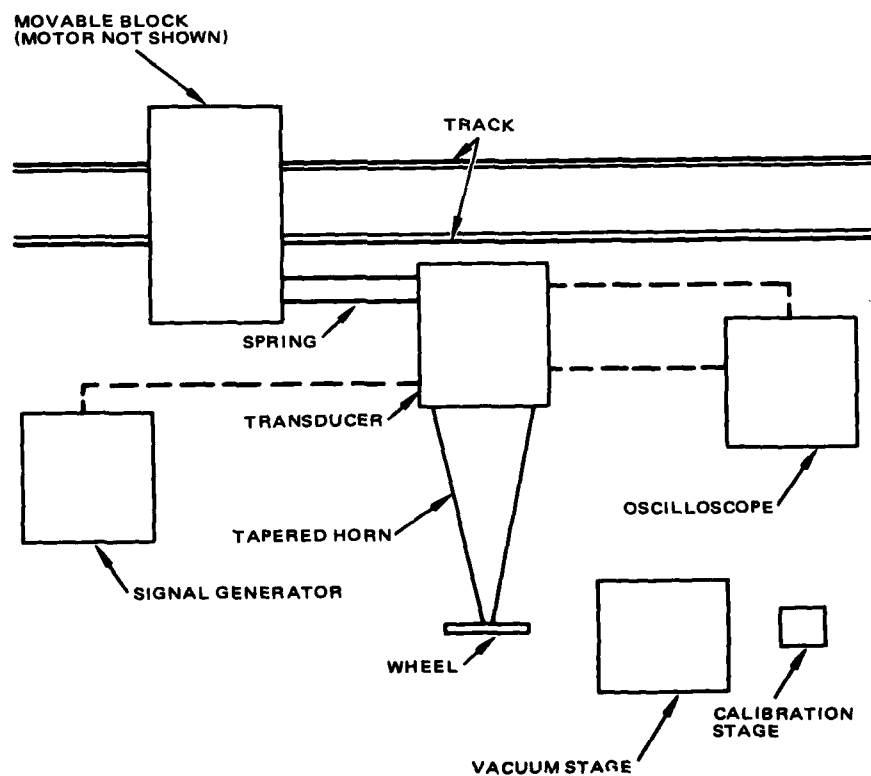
Top view schematic of ultrasonic seam welder and supporting equipment.
